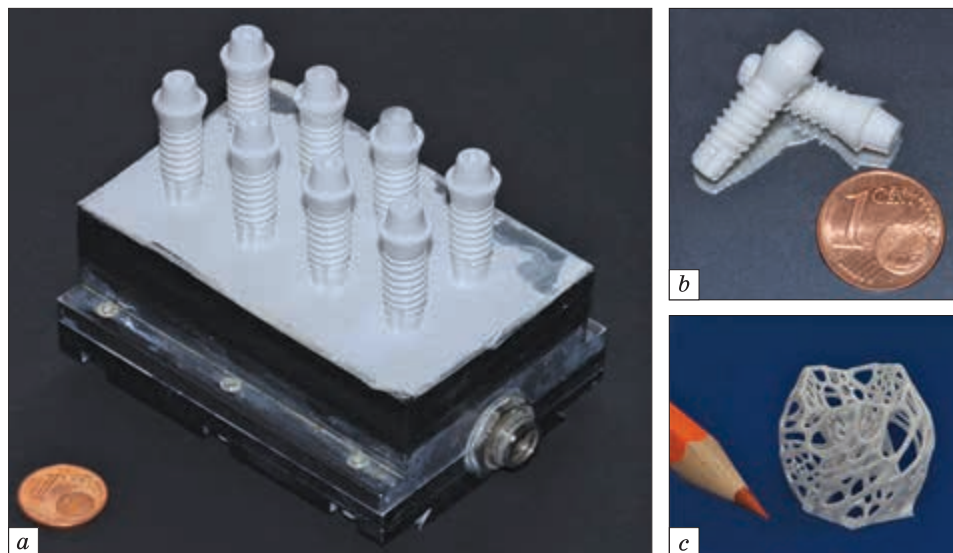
Green parts (a), sintered parts (b), and a cellular structure made of ZrO_2 (c) fabricated using the SL-DLP-based 3D printing [69]
